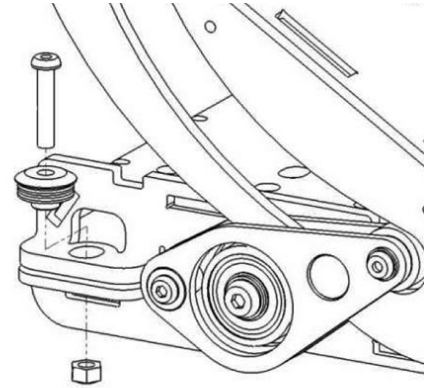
Remove the screws, spring washers and nuts on the left and right hand side.
